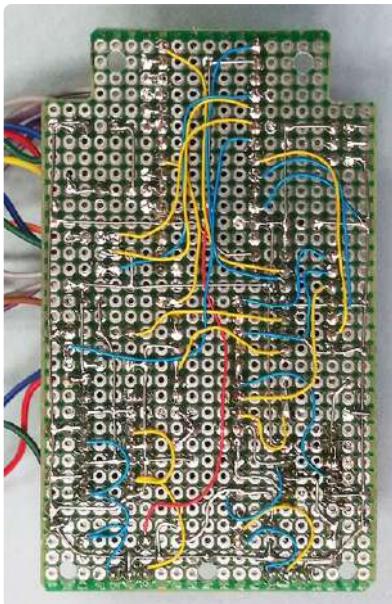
Bottom side of the prototype board with additional stranded wires and hookup wires.
